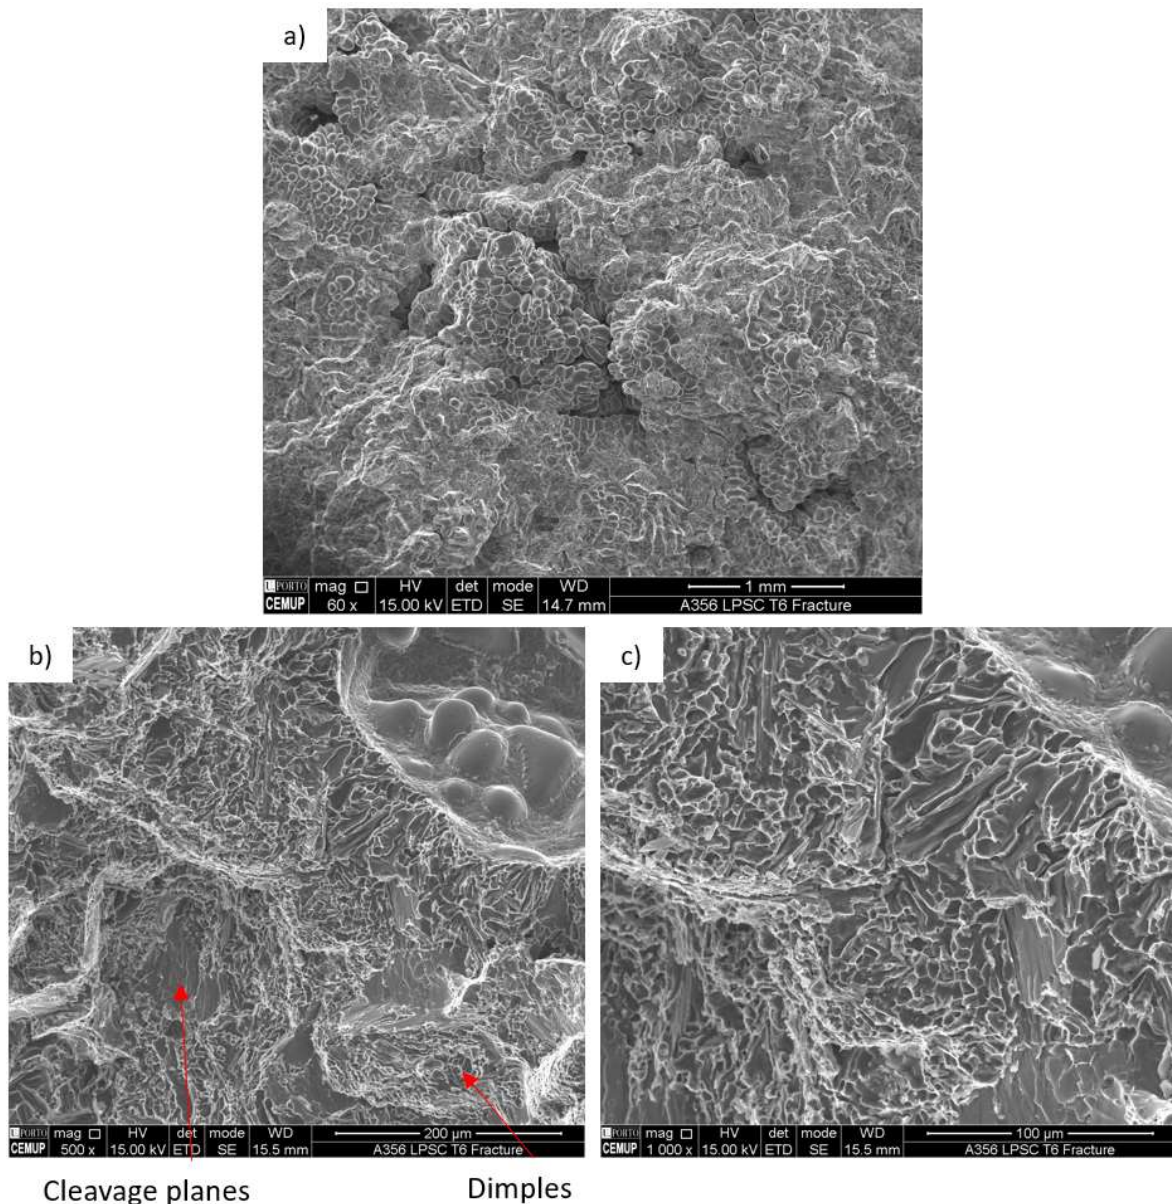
T6 A356 fracture surfaces obtained with SEM.
